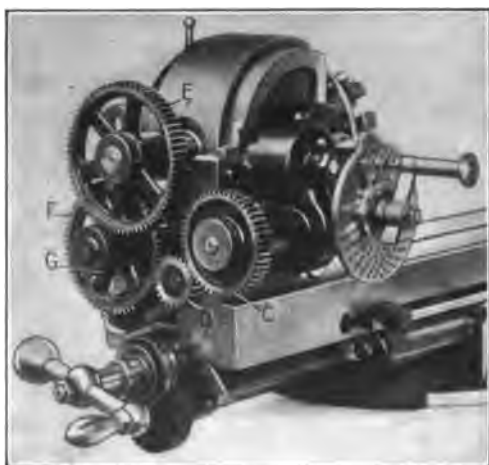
Index Head Equipped with Compound Gearing for Differential Indexing
